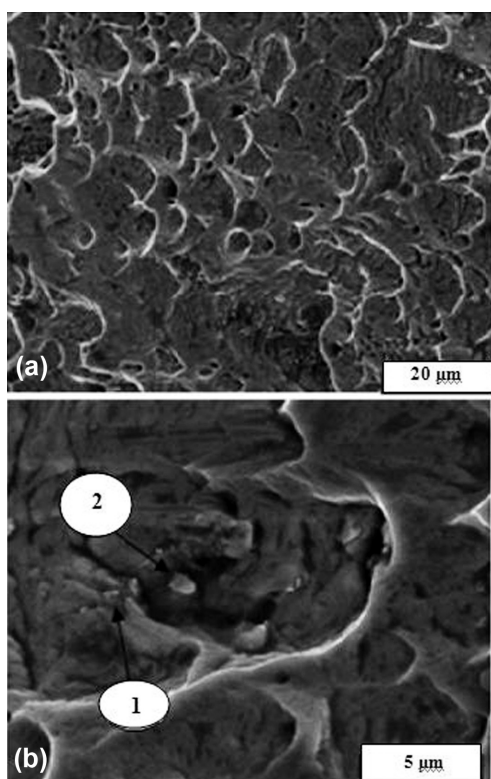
a) The appearance of a fracture surface after the heat treatment R2, b) carbides at the fracture surface
